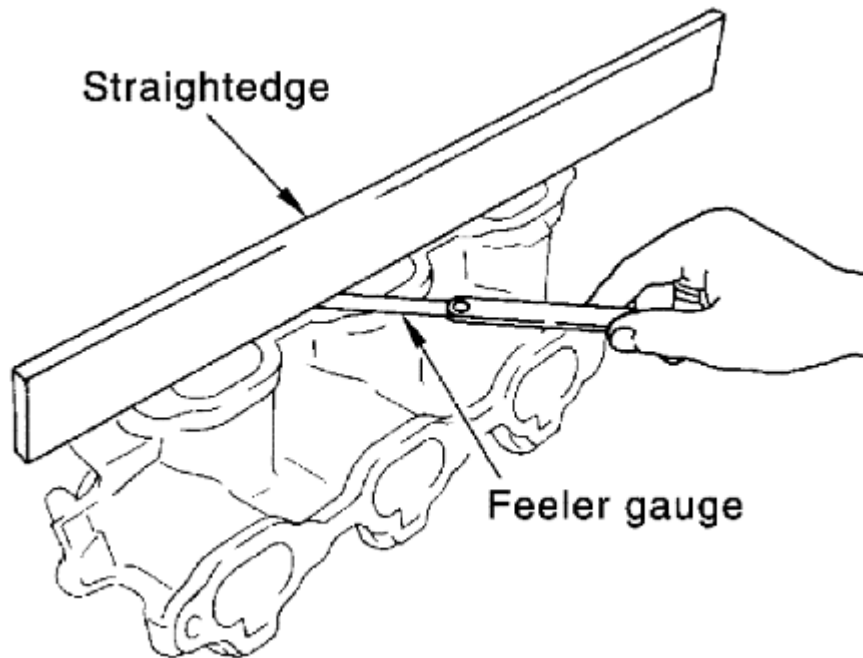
Checking Surface Distortion Of Intake Manifold Mating Surface With Straightedge And Feeler Gauge
